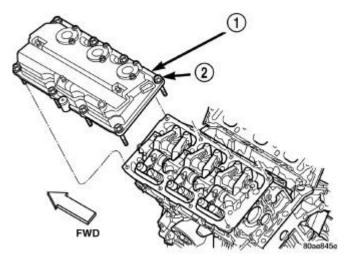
Cylinder Head Cover & Bolts Courtesy of CHRYSLER LLC
